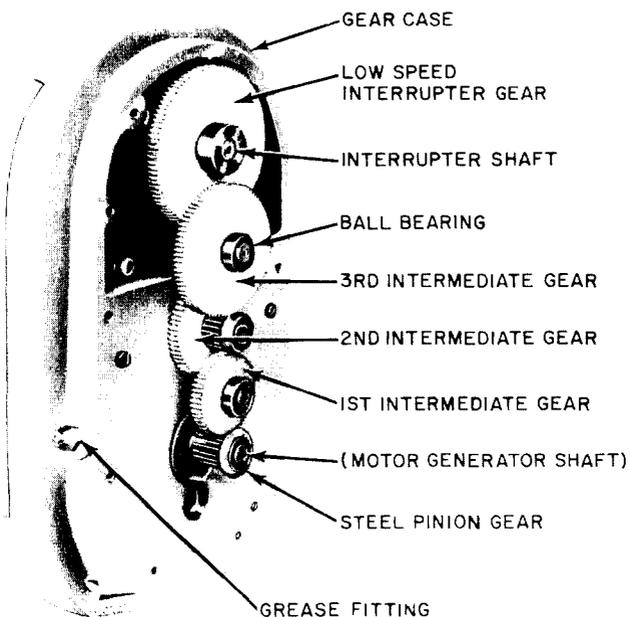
Interrupter Gears—Gear Case Cover Removed—Commercial Electric Products Company (Same design previously manufactured by Holtzer-Cabot)
